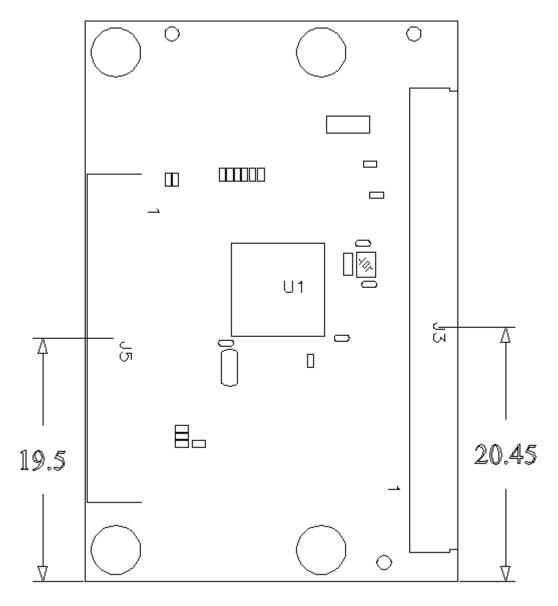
ADP-MIPI2RGB1 Adapter Board Bottom
